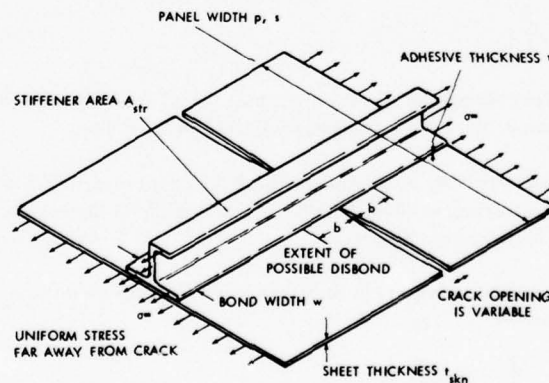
STIFFENER BONDED TO FULLY CRACKED SHEET
